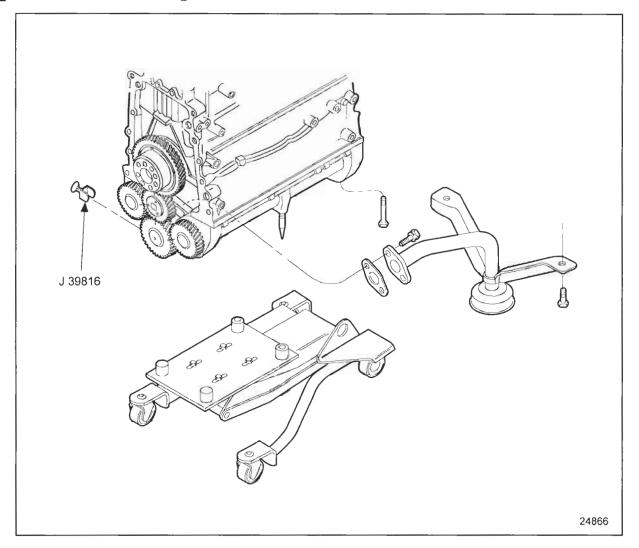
Balance Shaft and Oil Pump Mechanism Showing Tool J 39816
